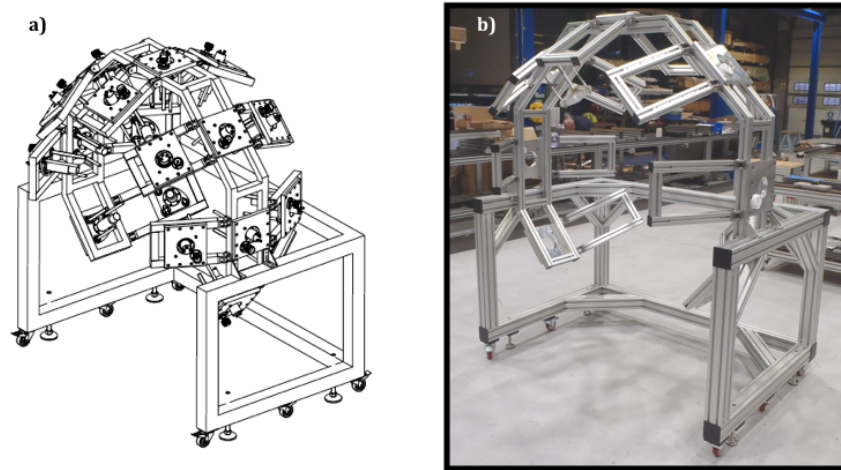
Spectrometer holding frame for the first prototype to be tested in the clinical environment. a) Frame design. b) Final structure assembled at the manufacturer.
